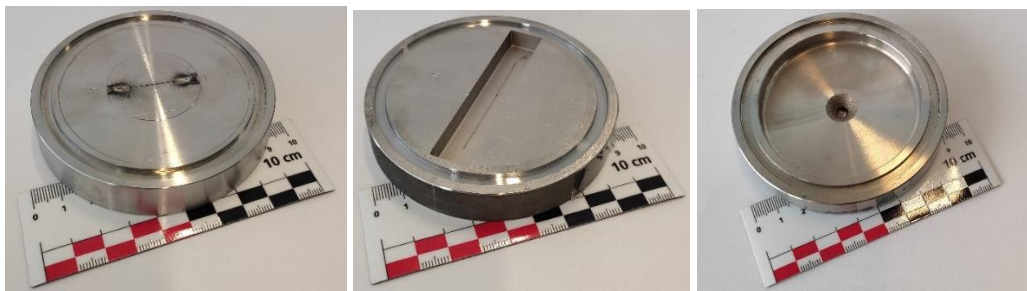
Second benchmark phase specimens: Artificial slit (left), fatigue crack (centre), and a detail of the thin specimen for steam generator tube leak testing (right)
